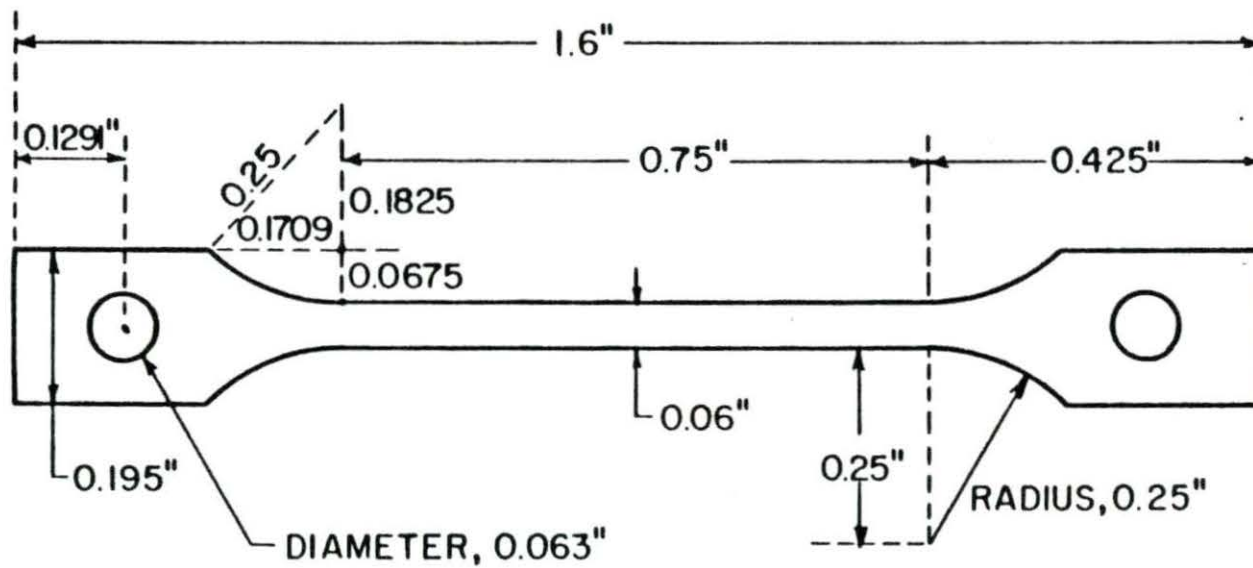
Dimensional view of the 30 mil thick sheet tensile specimen
